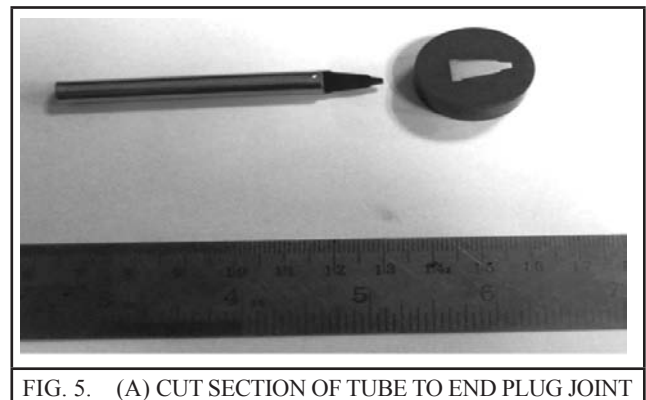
(A) CUT SECTION OF TUBE TO END PLUG JOINT
